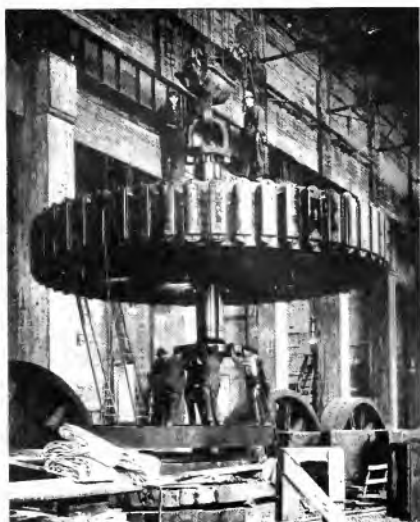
Special Eye Bolt for Lifting Complete Rotor
